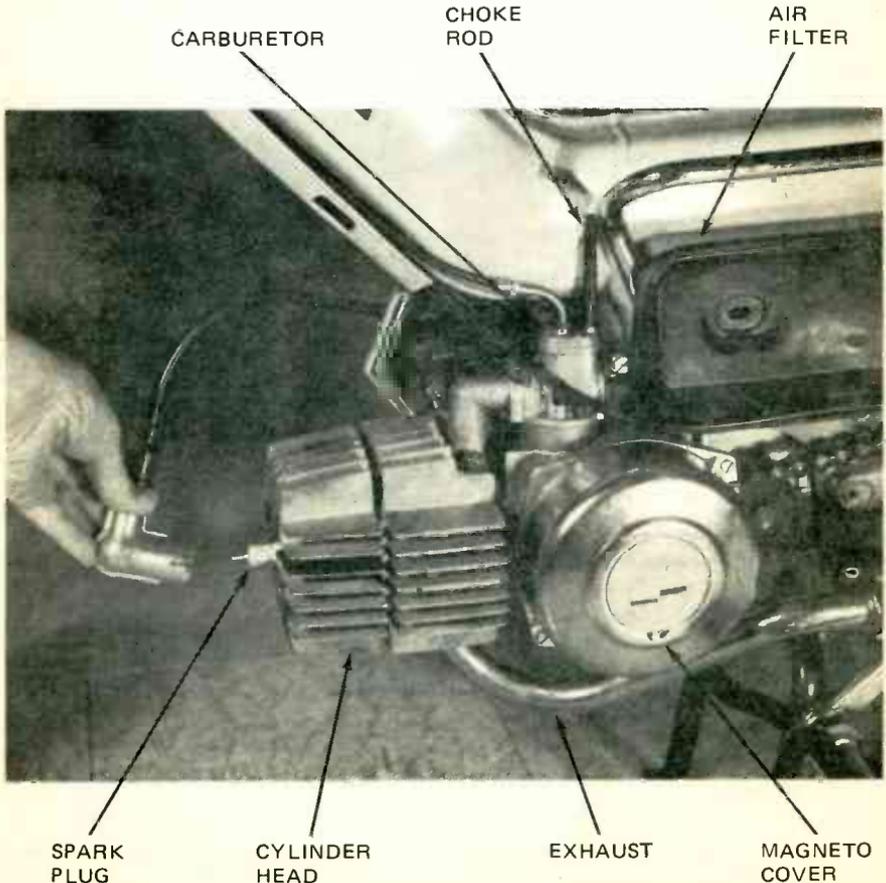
VIEW OF THE MOPED ENGINE AND CARBURETOR.
